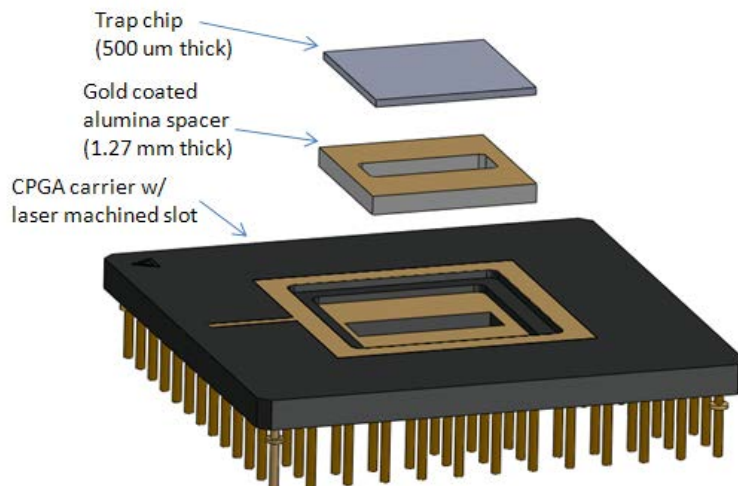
Drawings of the carrier assembly with trap, spacer, and carrier mounted with AuSn solder.
